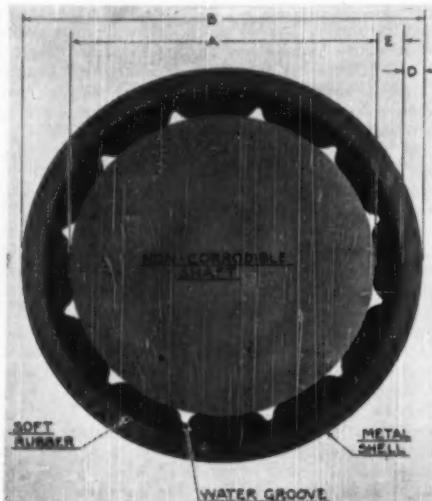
CROSS SECTION OF FULL-MOLDED-TYPE RUBBER BEARING
